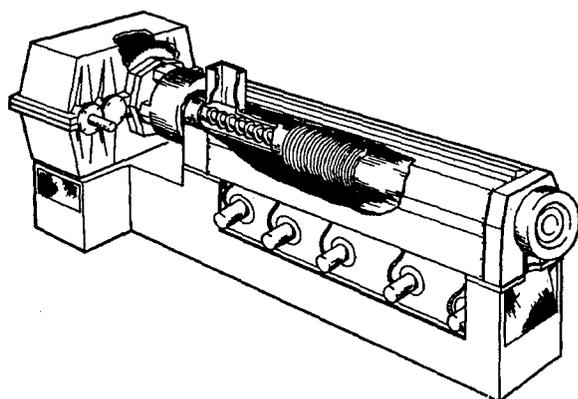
Drawing of full-scale extruder with 4.5-in. diameter screw.
